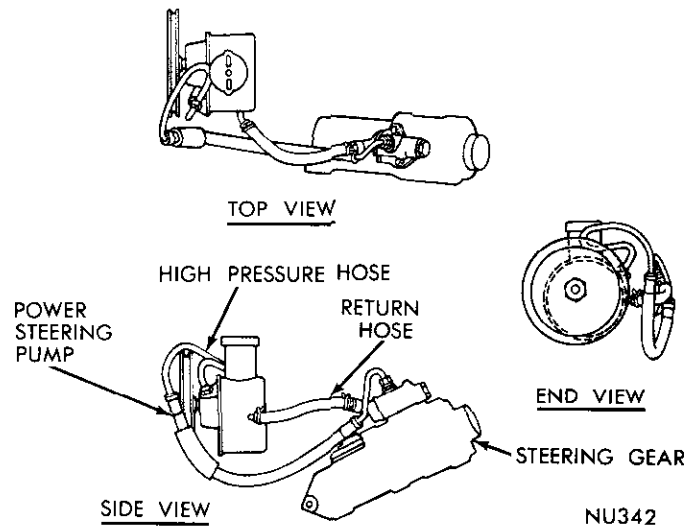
Hose Routing—1.06 Pump 8 Cylinder Engines
